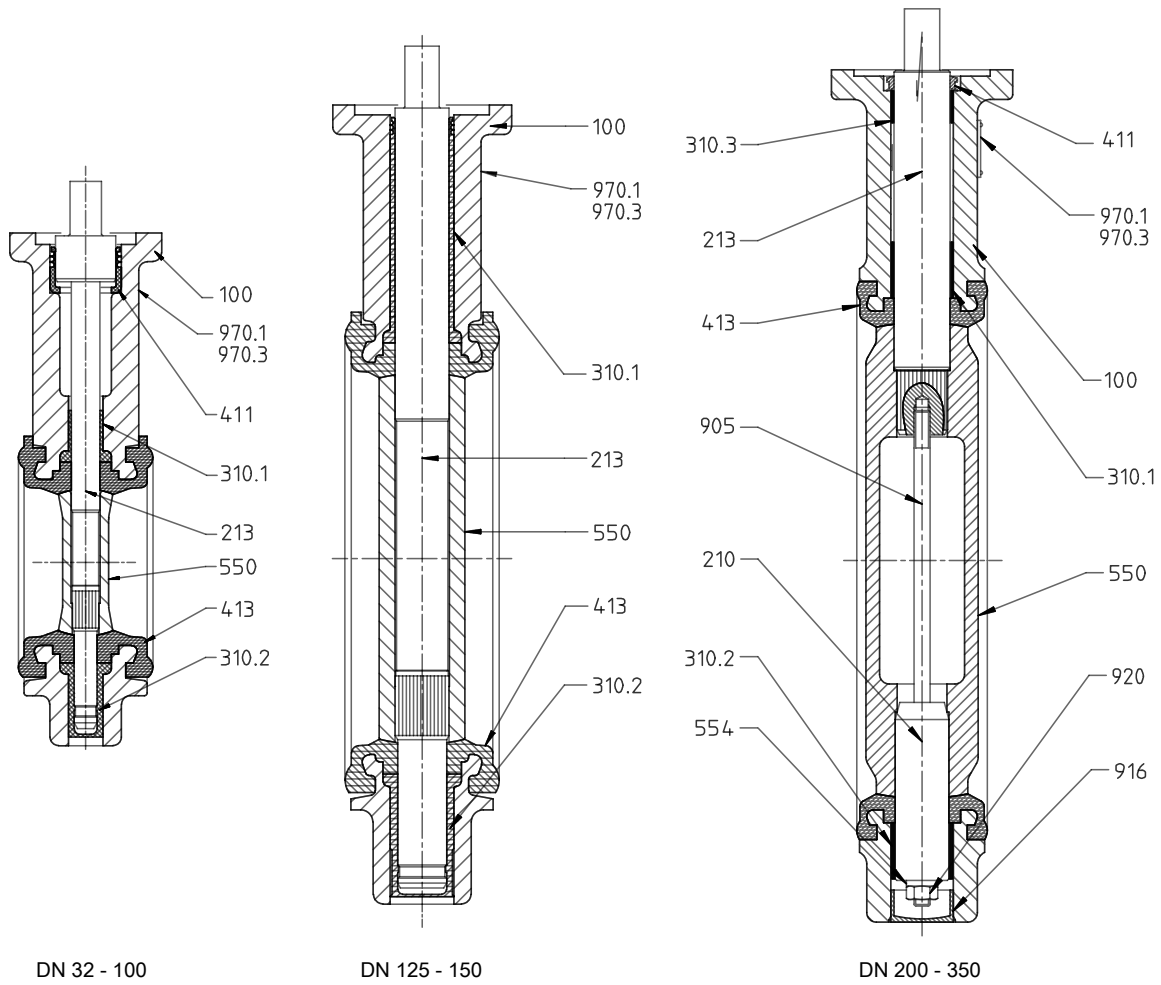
Sectional drawings of ISORIA 20/25, DN 32 - 350
